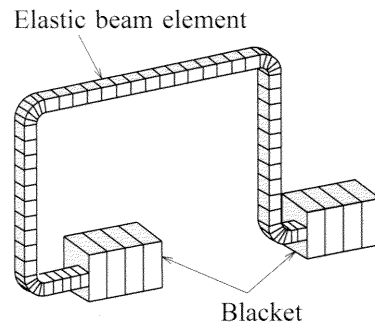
Three-dimensional finite element model for R-1 spring and brackets
